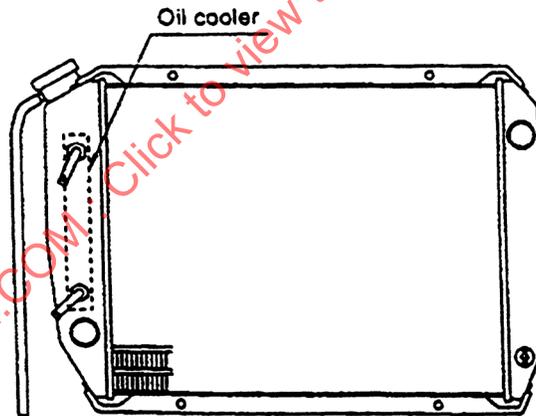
EXAMPLE OF OIL COOLER INSTALLATION
